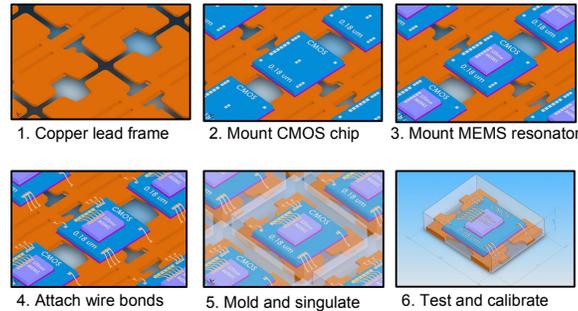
The MEMS QFN assembly showing chip on lead construction and stacked die
